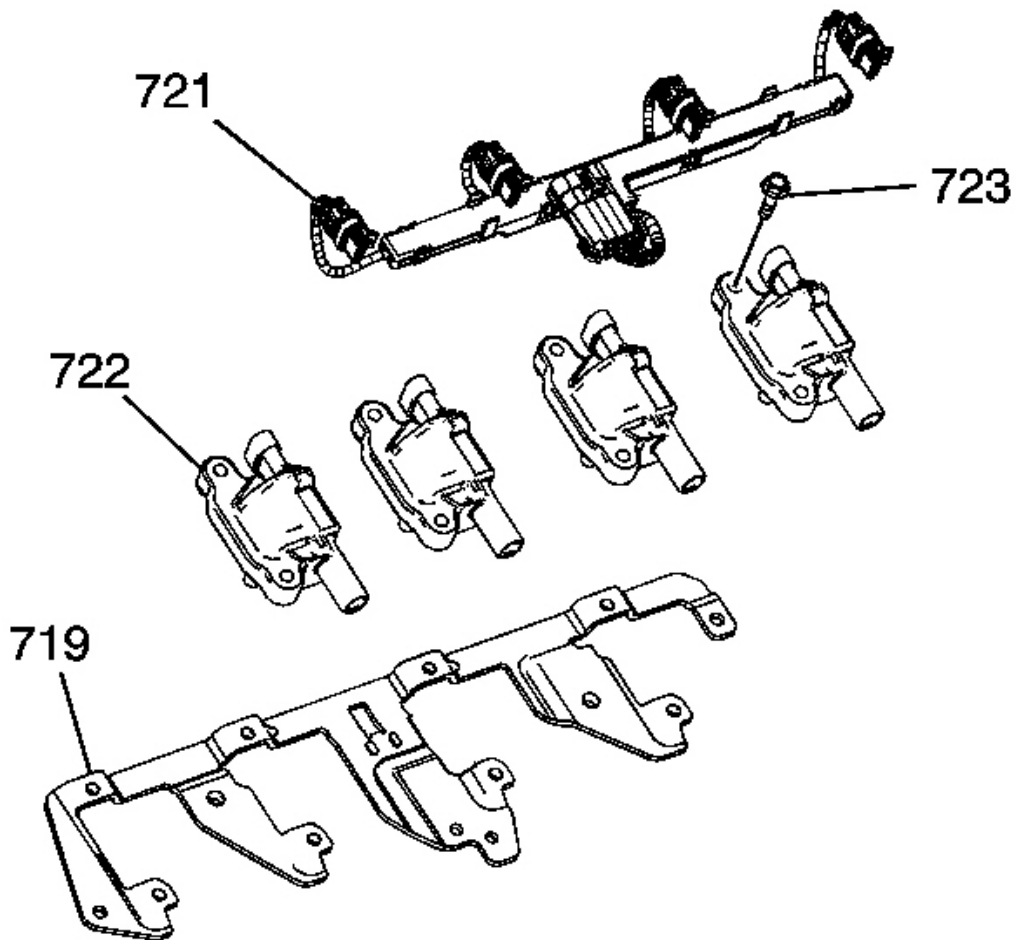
View Of Bracket, Bolts, Coils & Wire Harness
